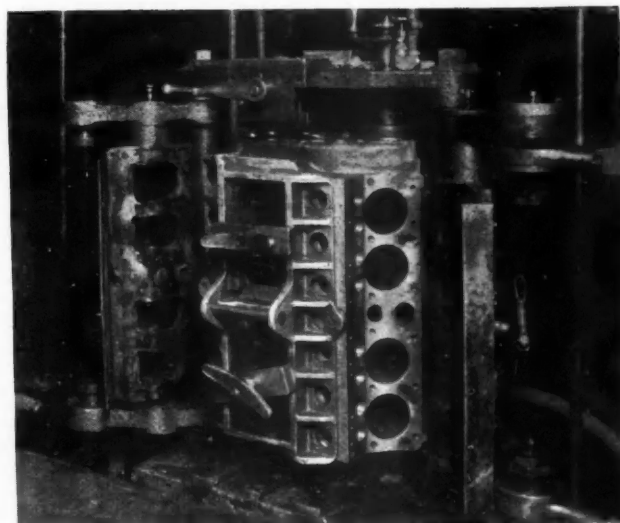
Water testing machine with clamping leaves drawn back to show block in position. The block is tested in a vertical position, hot water being used at a pressure of 60 lb. per sq. in.
